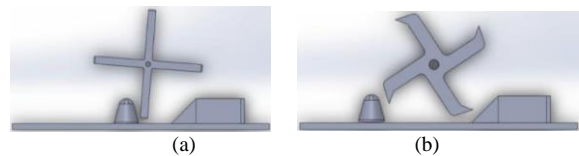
CAD of Roller with (a) Square Edges and (b) Sharp Edges of the Collection Mechanism.
